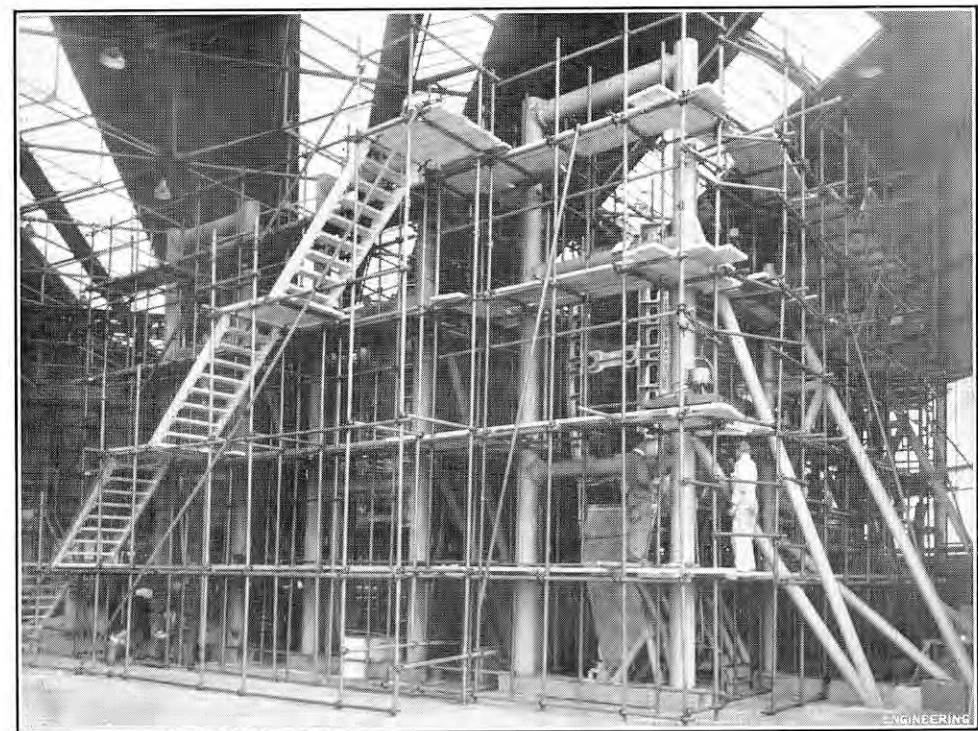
TRIPLE ASSEMBLY FIXTURE FOR WINGS.
